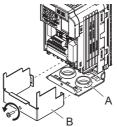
Remove the Terminal Cover on an IP20/NEMA Type 1 Drive
